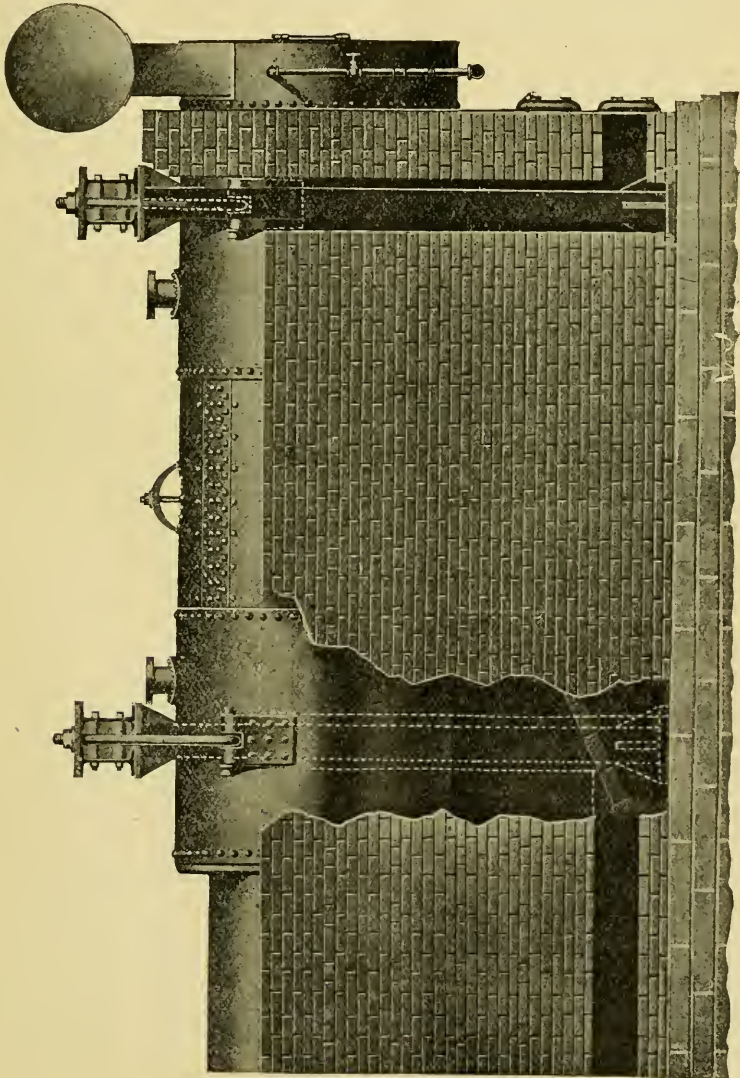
SIDE VIEW OF SUSPENDED BOILER.
